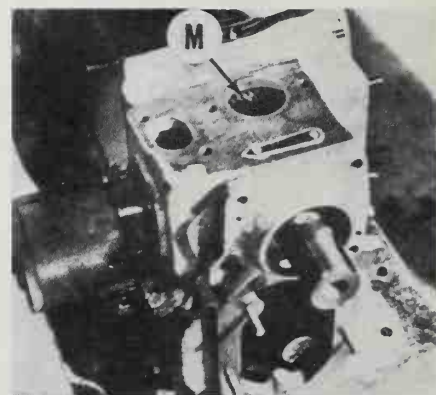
Align "I" mark on camshaft gear with mark (M) on crankcase. Piston must be at TDC. Refer to text.
